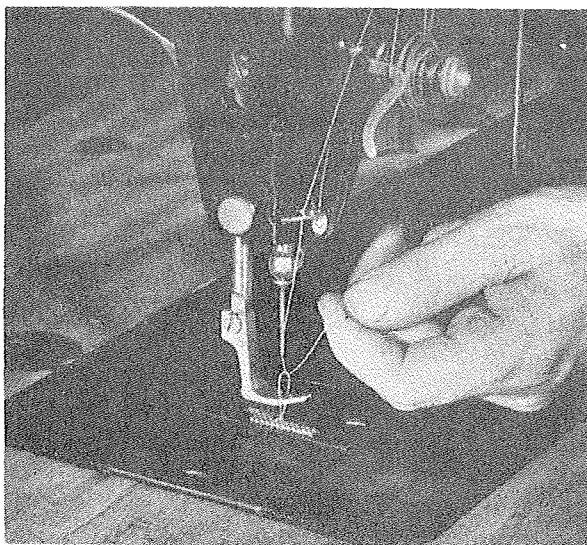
Needle thread being used to draw bobbin thread up through hole in throat plate
